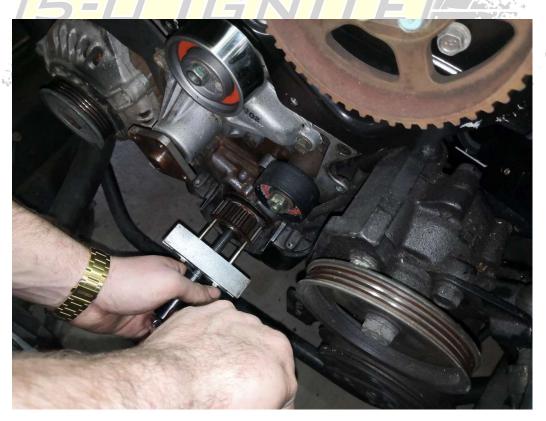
Removing the Old Sprocket Using Steering Wheel Puller
